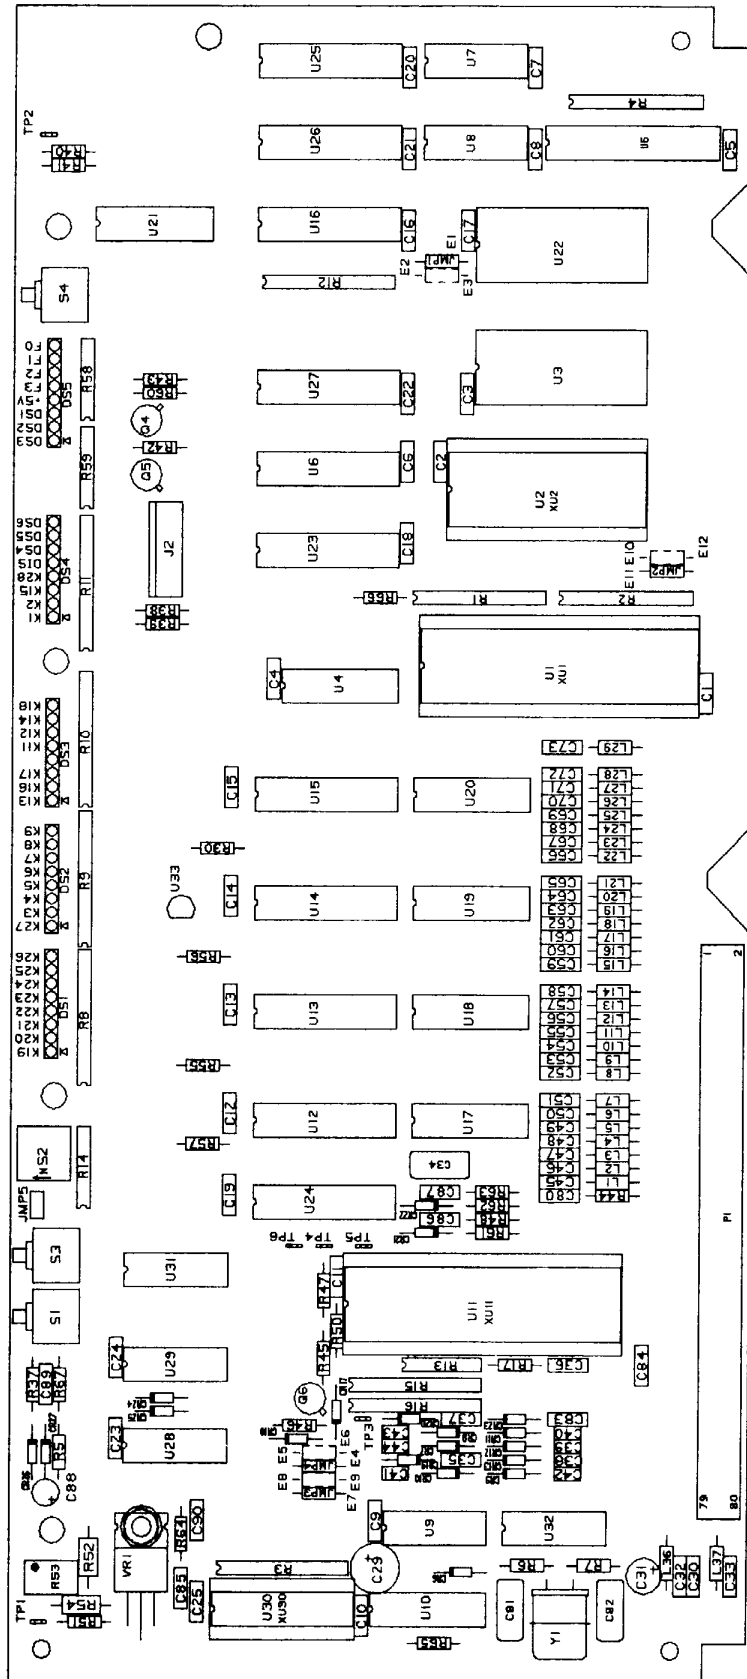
A3 Control PWB Assembly (10208-1300) Component Locations
